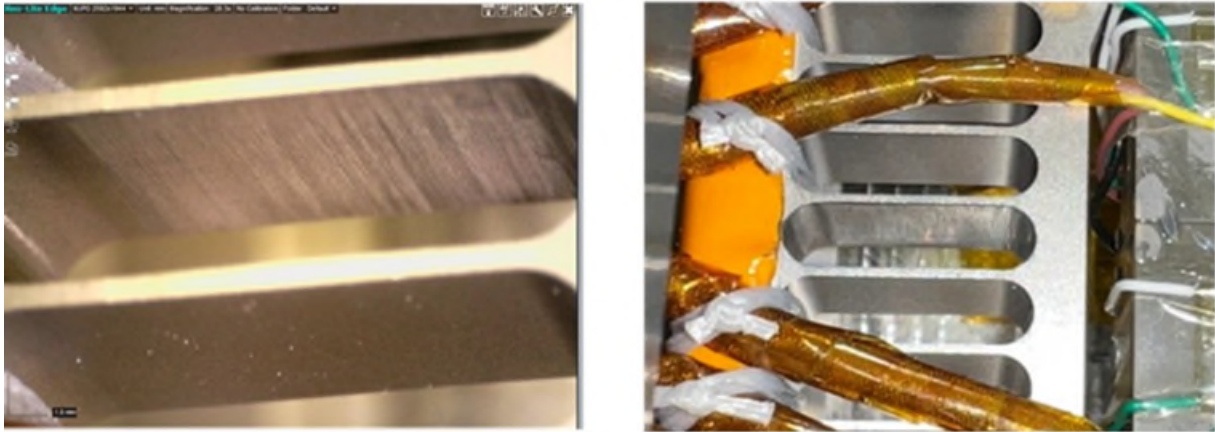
1-mm scaled, fine-tuned flexure blade on the FCM EDU (left – top flexure blade), 1-mm un-tuned flexure blade on the FCM EDU (left – bottom flexure blade) and zoomed out image of the fine tuned and un-tuned flexure blades (right).
